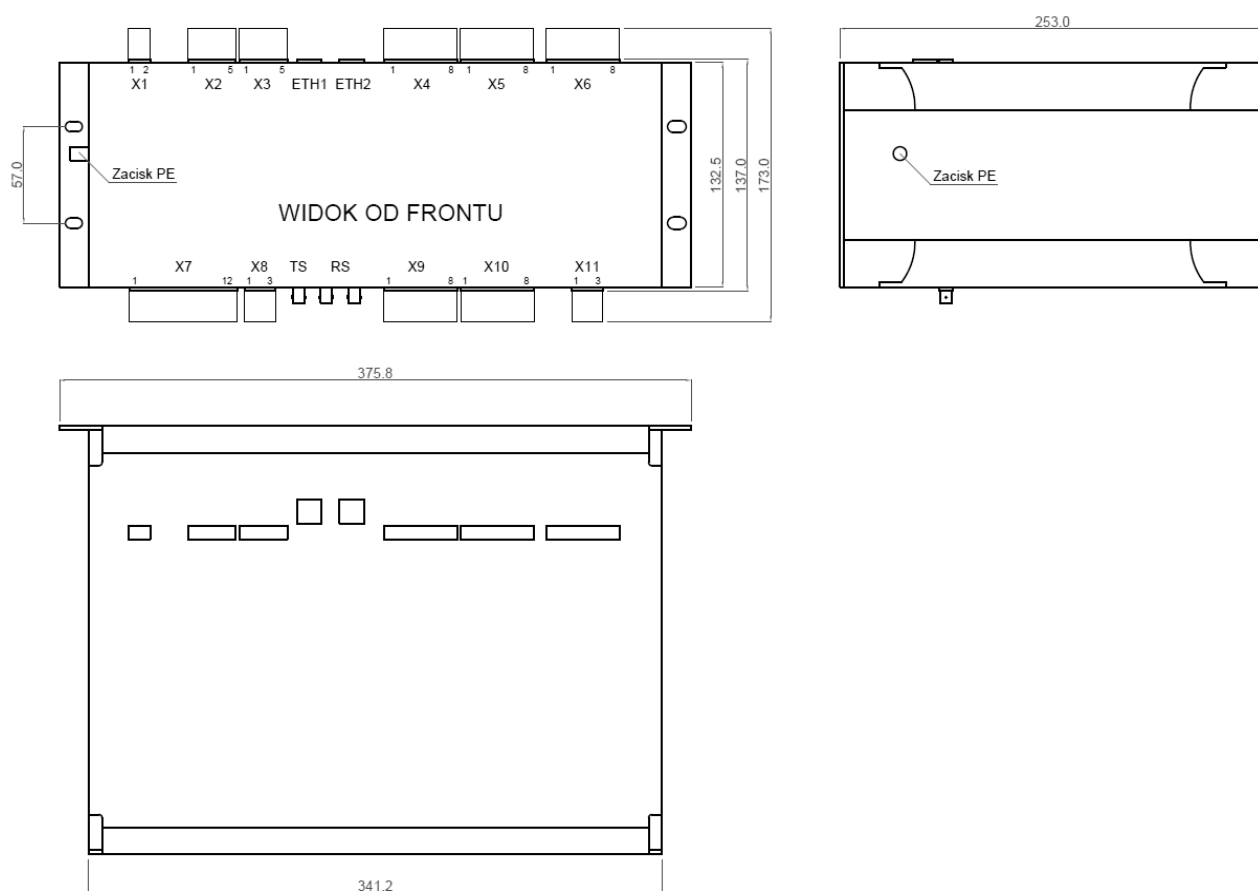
Version 1: Panel mounted housing Profi Set 63T of APRA company
